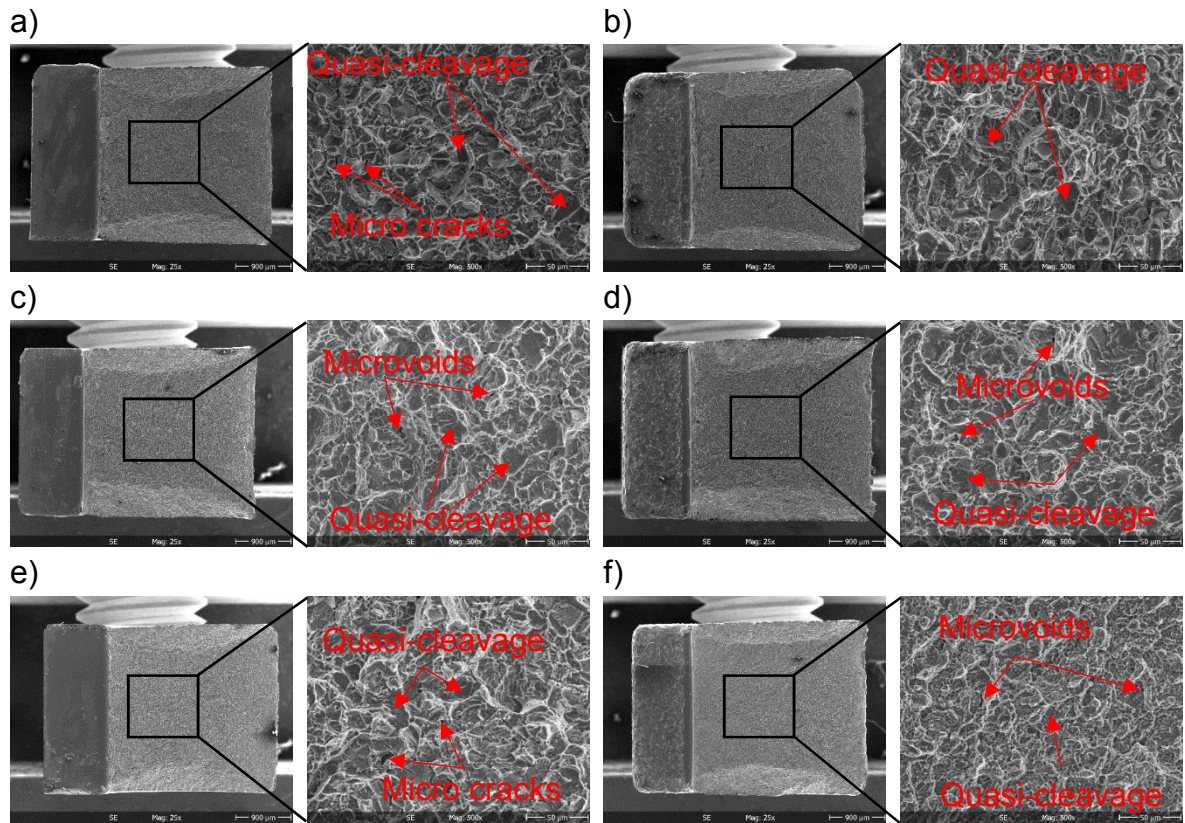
Fracture appearances after impact testing for a) BM, b) BM SP, c) AW, d) AW SP, e) PWHT and f) PWHT SP.
